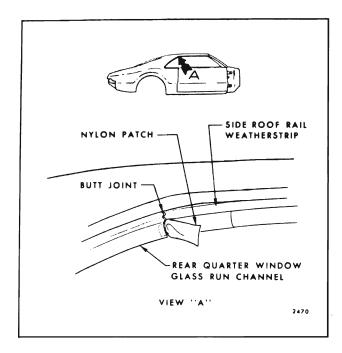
Side Roof Rail Weatherstrip Repair – ''E–87'' Styles
